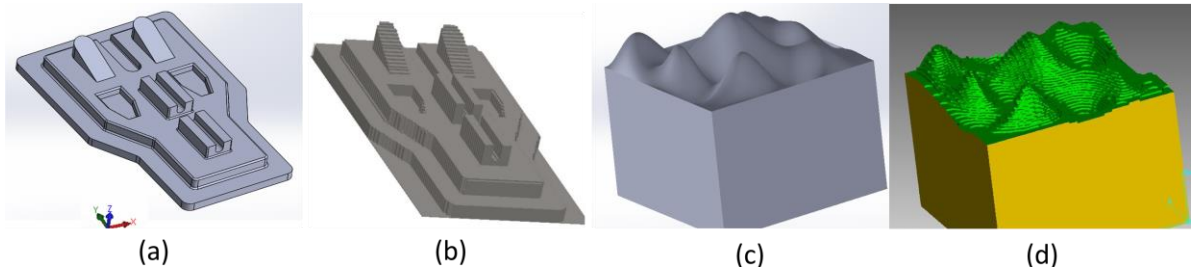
Part 1-(a) CAD model [22], (b) Part 1-Simulated machined component: (c) Part 2-CAD model, (d) Part 2- Simulated machined component.
